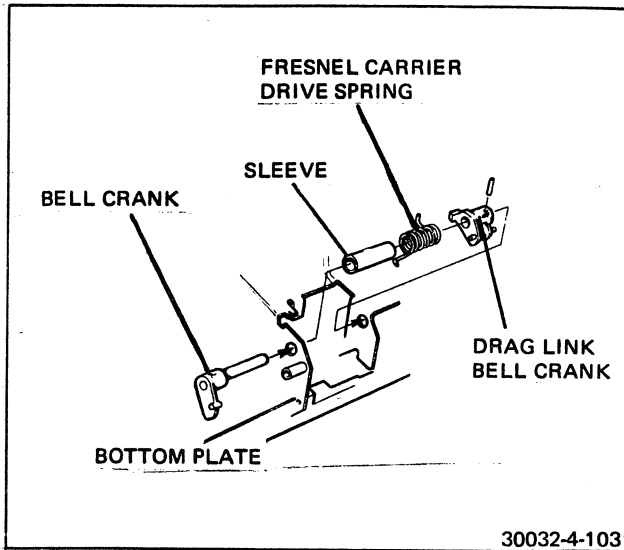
INSTALLING FRESNEL CARRIER DRIVE SPRING
